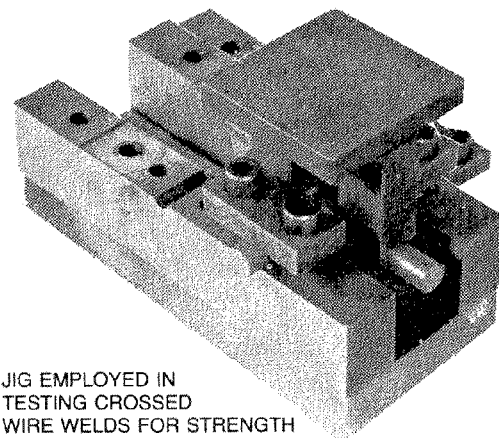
Sketch Of Jig For Physically Testing Crossed Wire Welds
